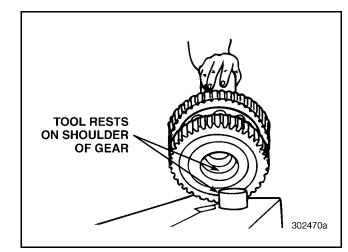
Main Drive Gear Pressed Flush onto Shaft (Driver or Press Tool Keeps Shaft and Gear Even)
